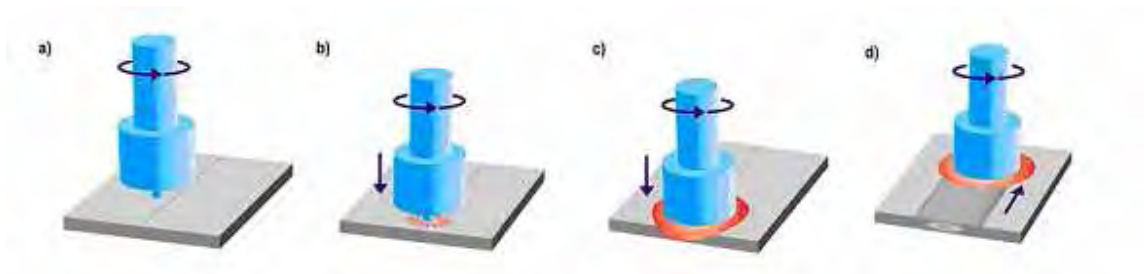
Friction Stir Welding phases: a) Initial state b) the plunge, c) dwelling phase, d) welding phase
